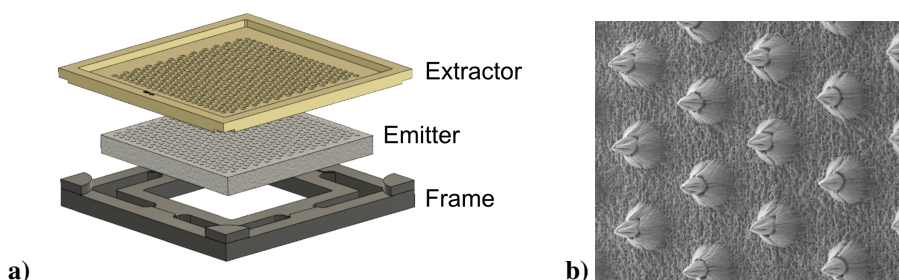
a) An exploded view of the thruster chip, showing extractor, emitter, and frame. b) Scanning electron microscope image of emitter tips.
